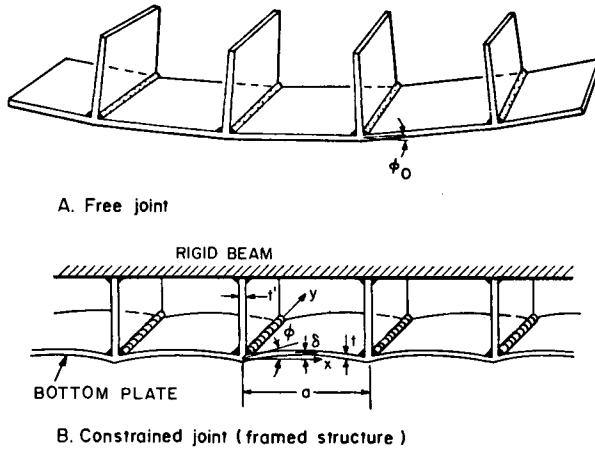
Distortion due to fillet welds in two types of one-dimensional models.
